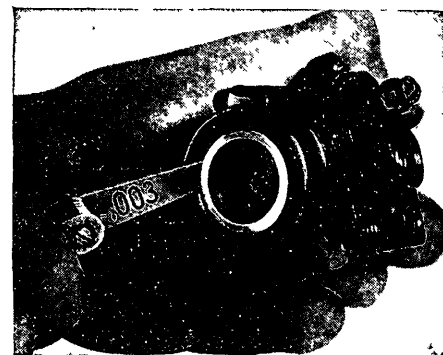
Checking wheel cylinder piston fit with feeler gauge
